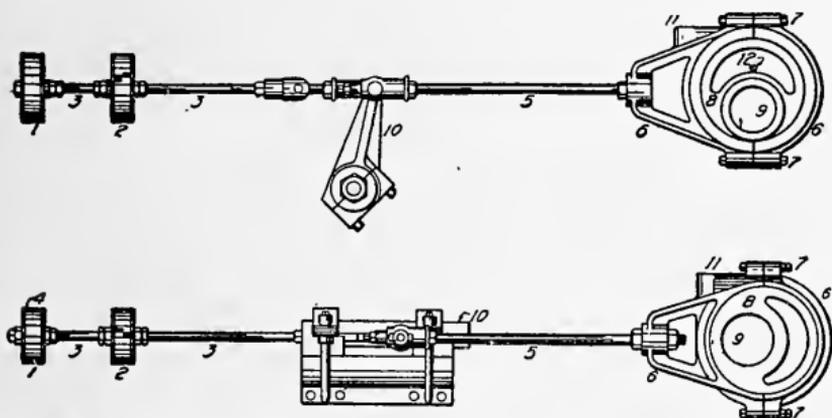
Eccentric Mechanism Showing Rocker and Ram Methods of Connecting Eccentric Rod with Valve Rod
